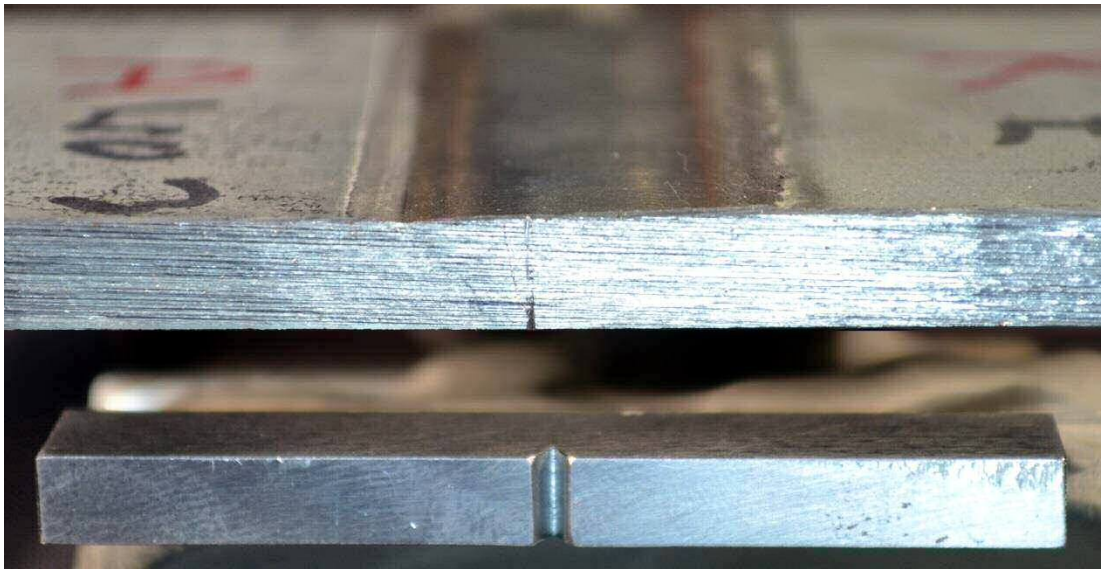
Charpy sample and notch orientation (bottom) relative to welded plate section (top)
